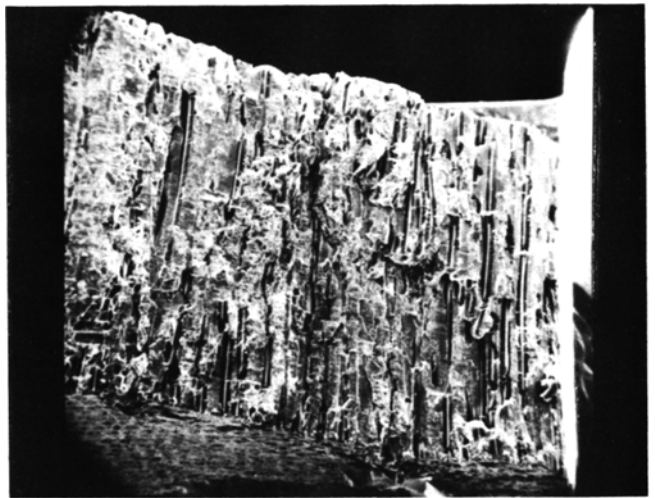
Fracture surface of 4.2 mil BORSIC-6061 transverse compression specimen.
